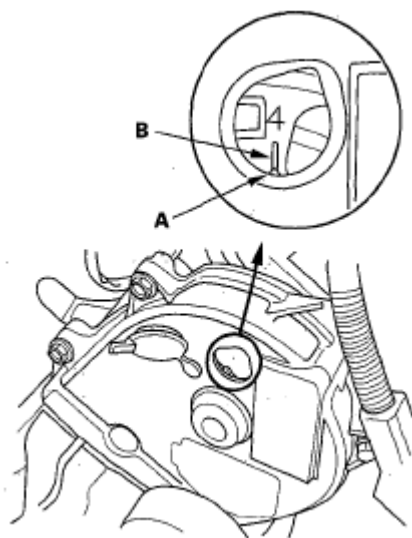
Identifying Front Upper Cover With No. 4 Piston TDC Mark On Front Camshaft Pulley
